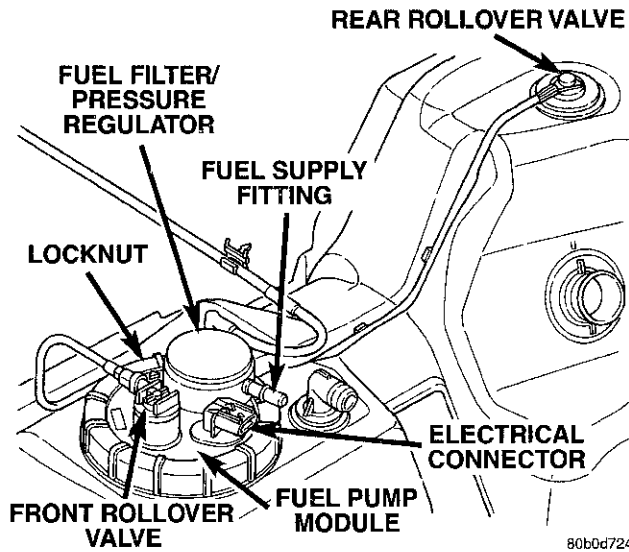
Fuel Pump Module—26 or 34 Gallon Fuel Tank
